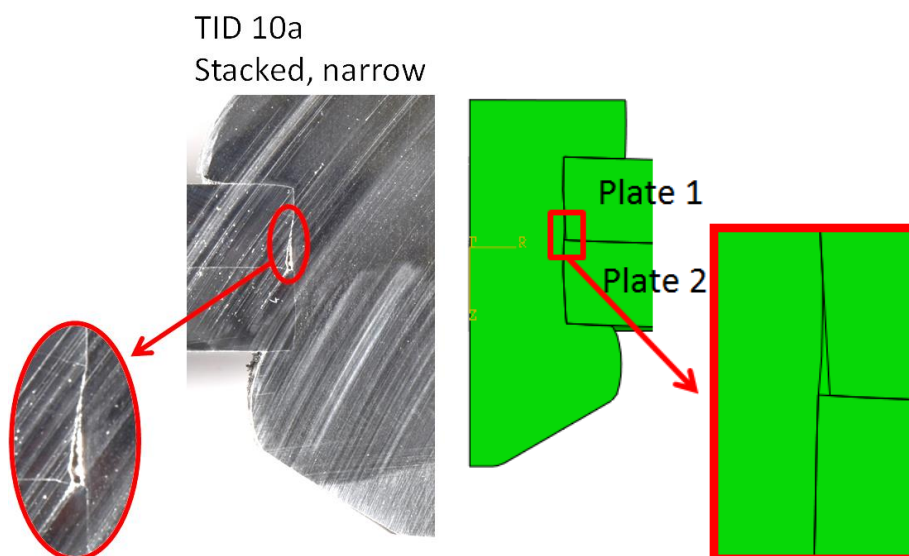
Hole filling. Largest void, between rivet and plates, observed for stacked narrow hole geometry.
